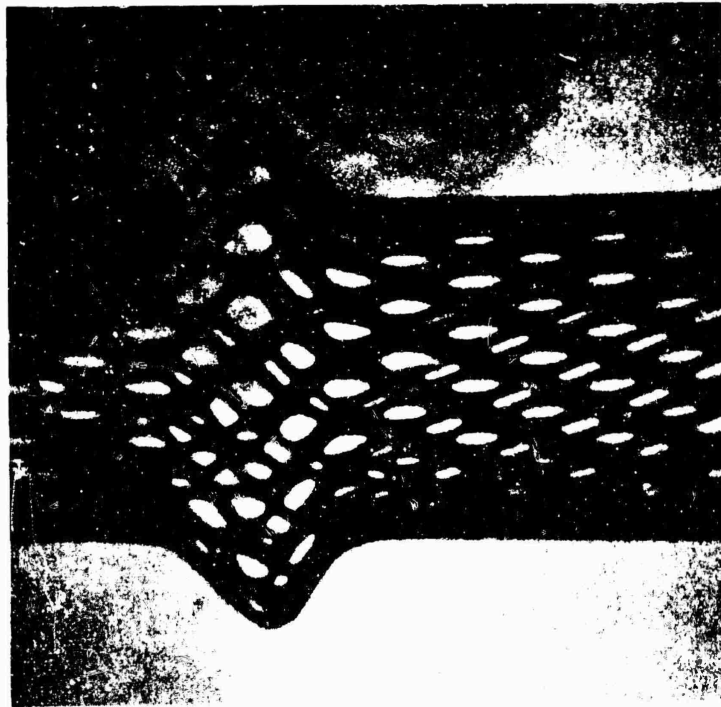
(c) -- Long Specimen With Vertical Orientation
